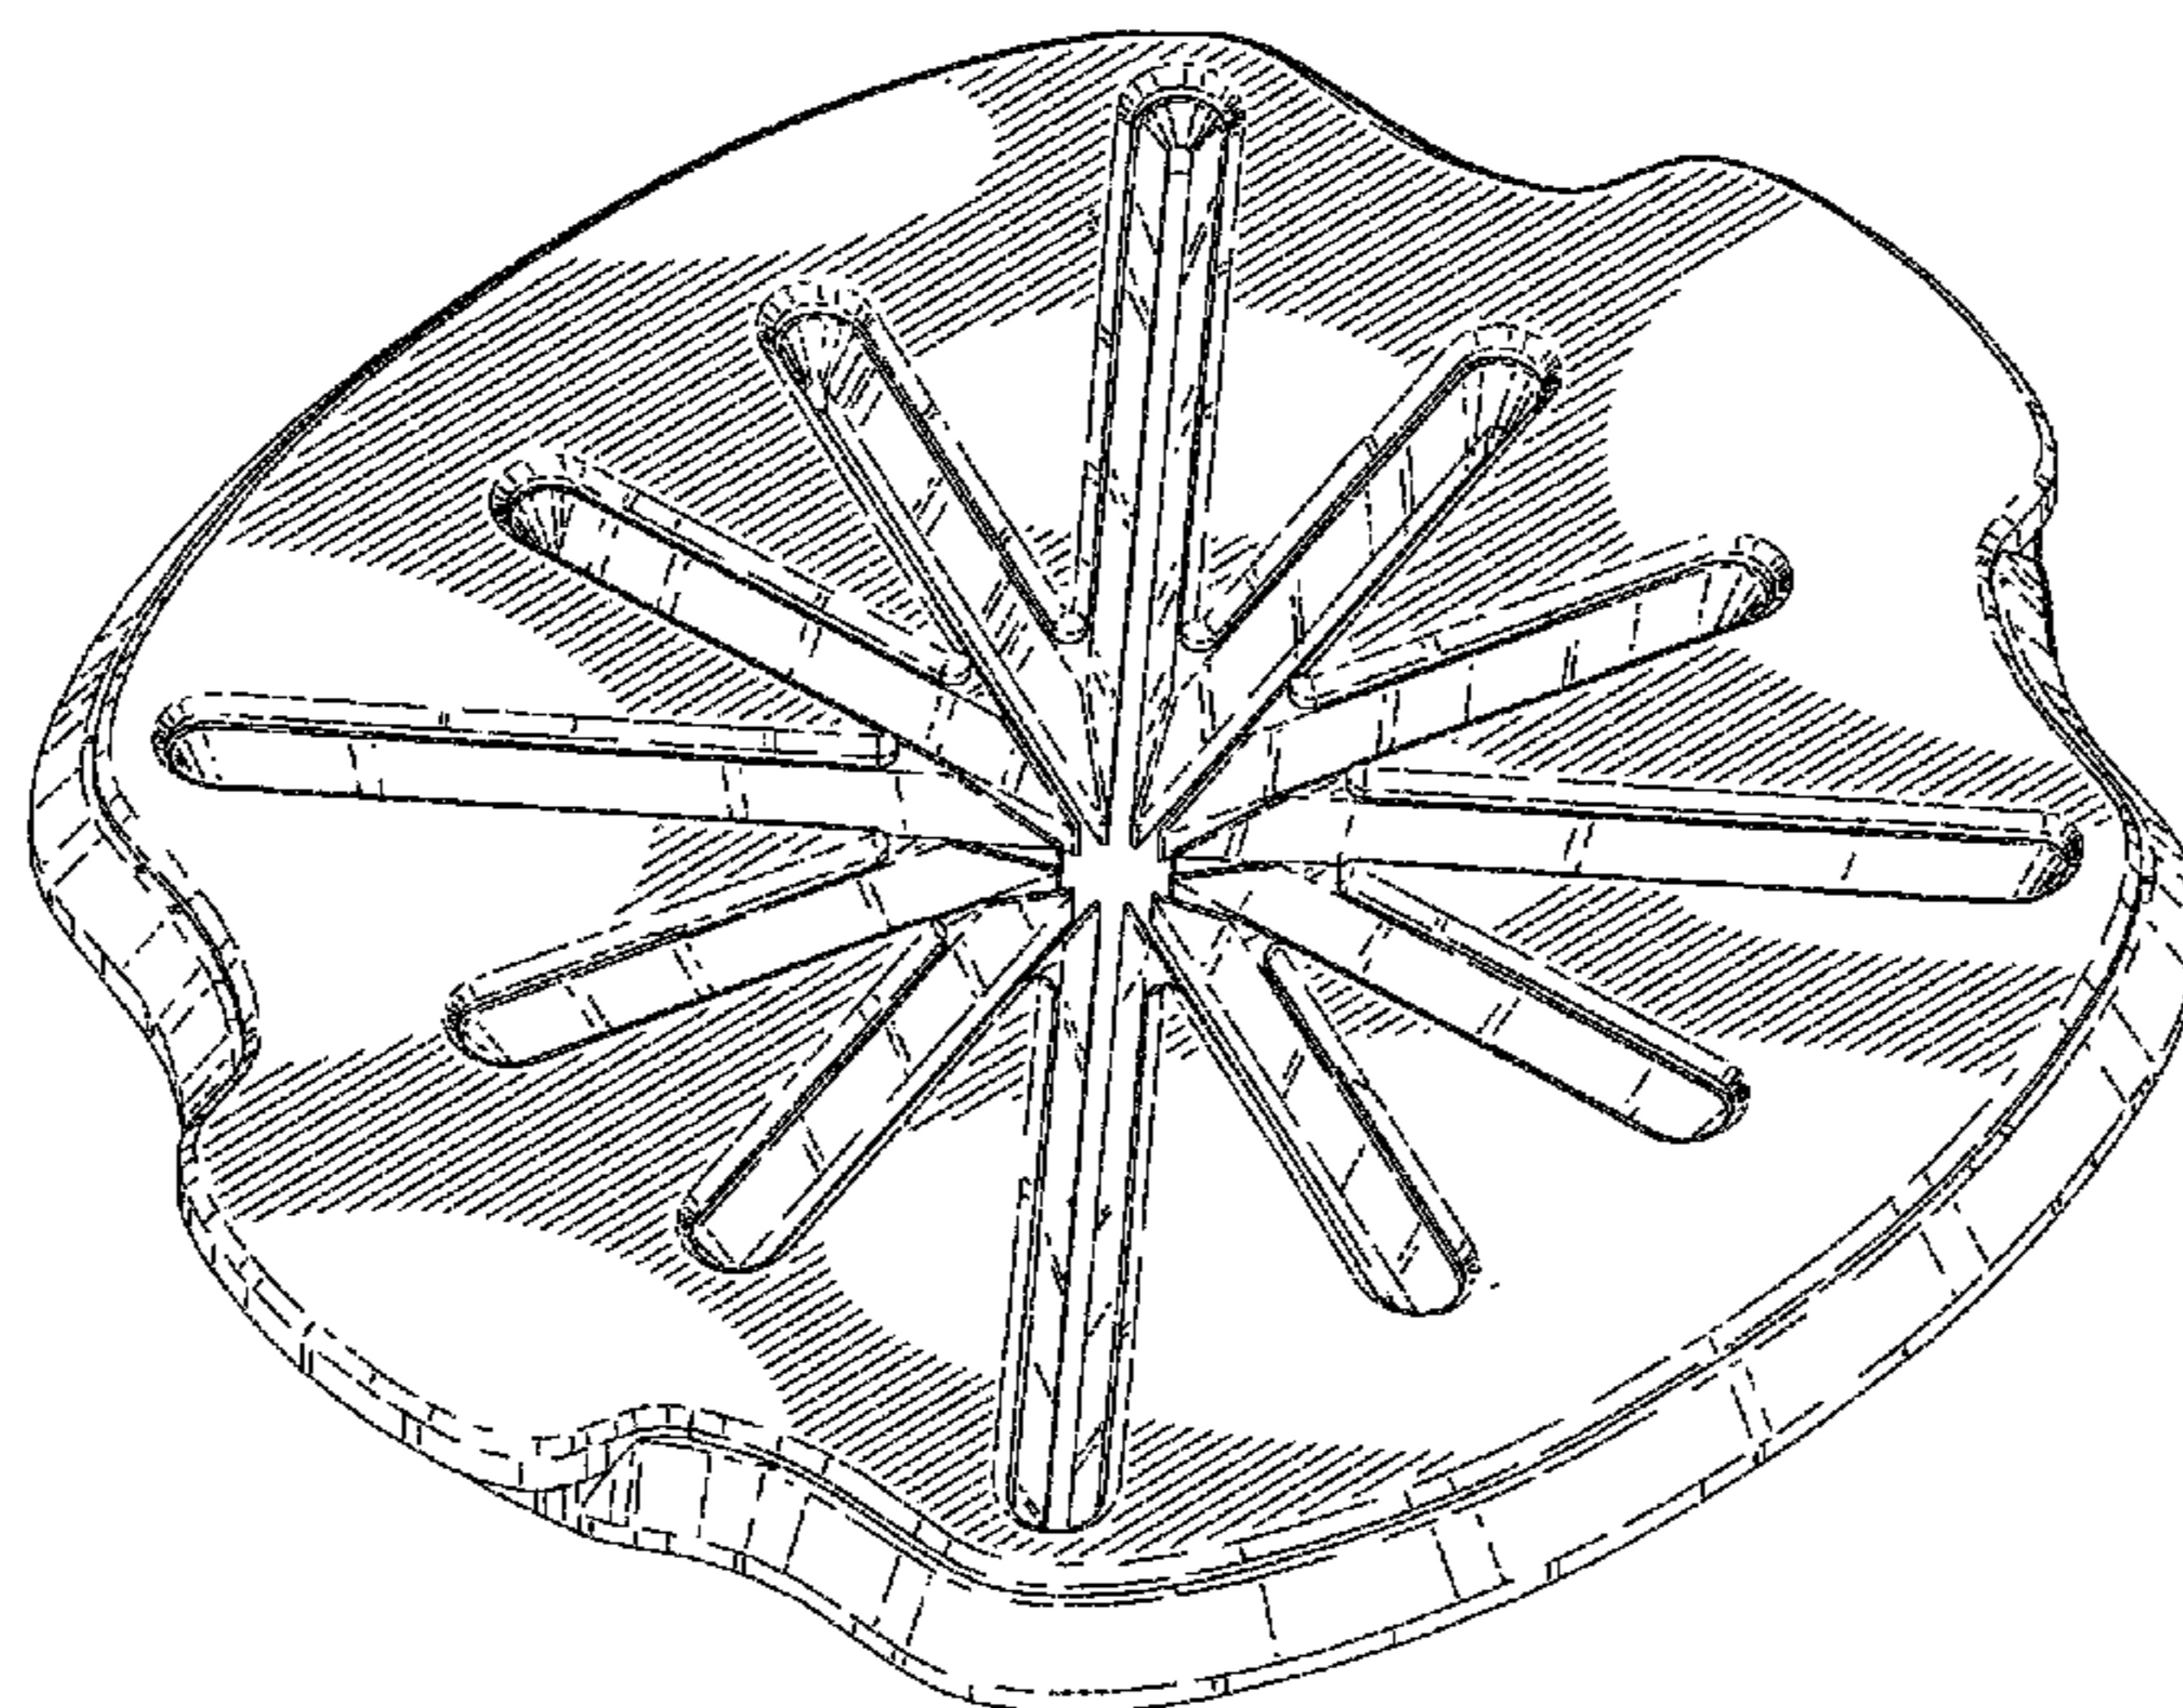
is a top view of the utensil for a whisk illustrated in FIG. 1;
